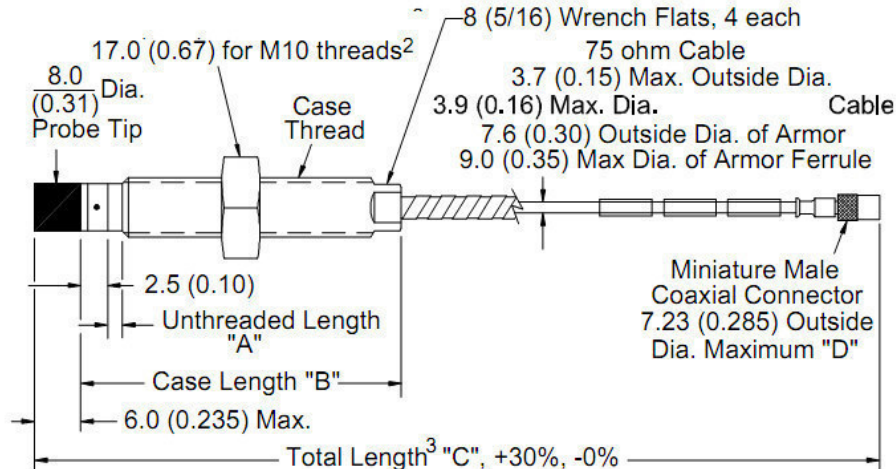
b: 8 MM STANDARD MOUNT PROBE
